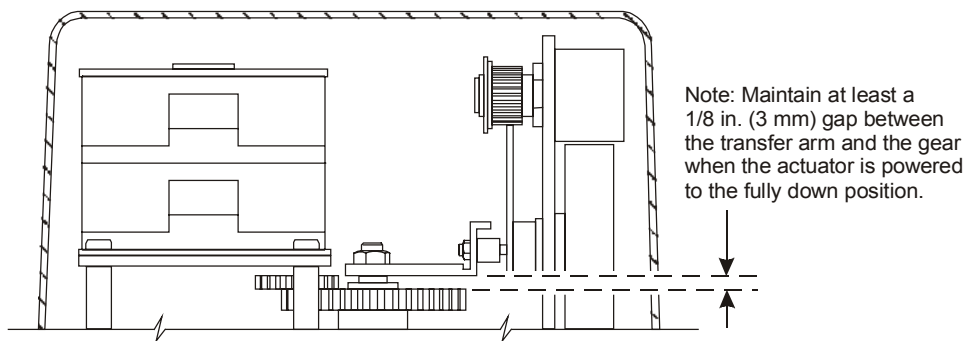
Location of the Gap Between the Transfer Arm and the Gear
